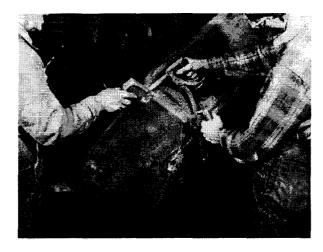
Magnetic Particle Testing of a Partially Filled Groove Weld
